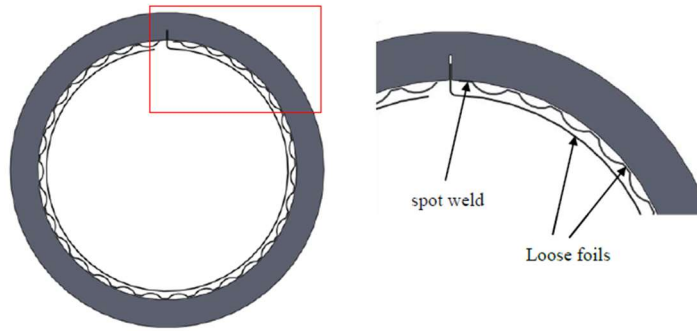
Exaggerated foil assembly condition before assembly onto the rotor.
